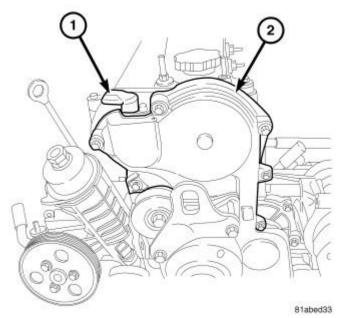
Upper Front Cover & Lifting Bracket Courtesy of CHRYSLER LLC
